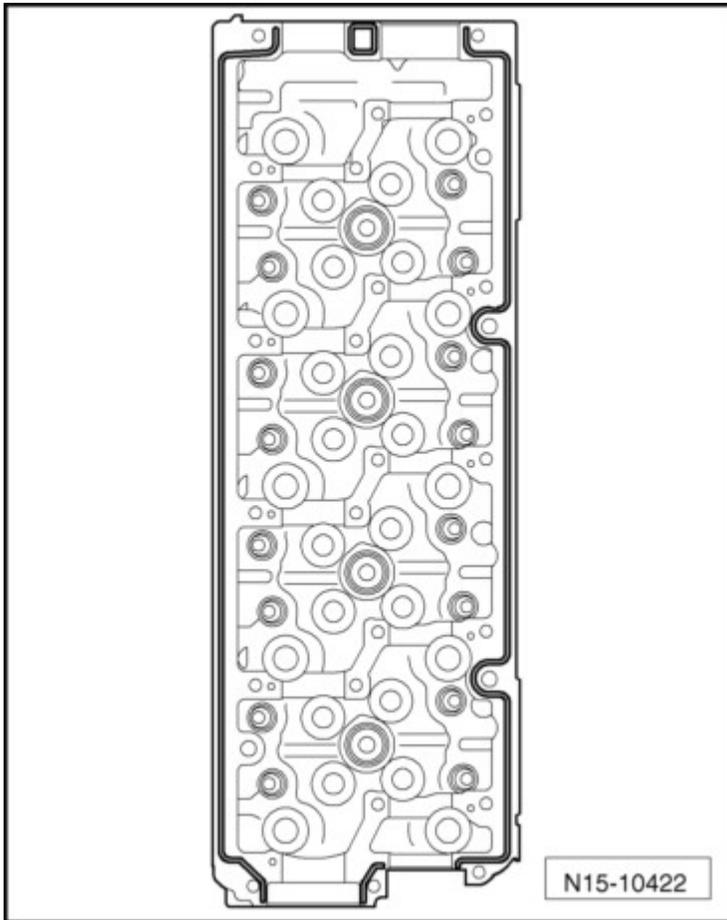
Identifying Silicone Adhesive Sealant Pattern
